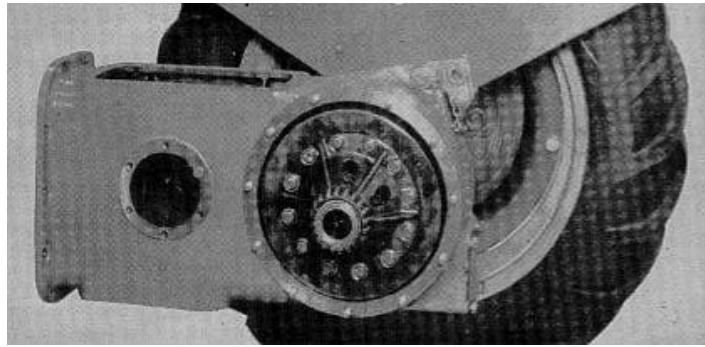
When left axle housing is removed, the differential can be lifted out. Models 2N-8N-9N.
